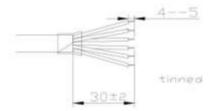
USB-RS232-WE Mechanical Details (dimensions in mm)
